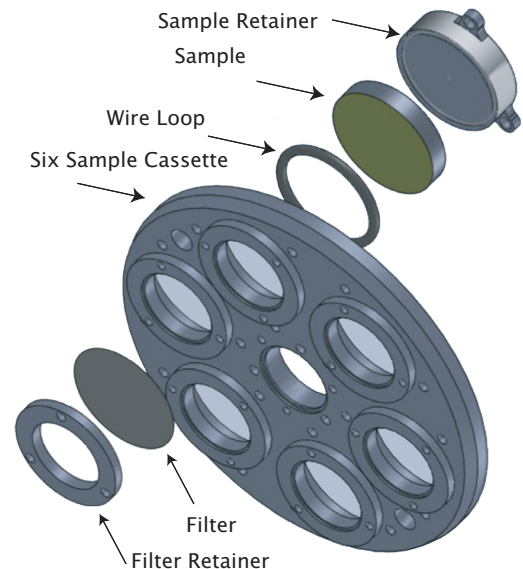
(color online) XRSA cassette exploded view showing both the filter-assembly and sample-assembly hardware.
